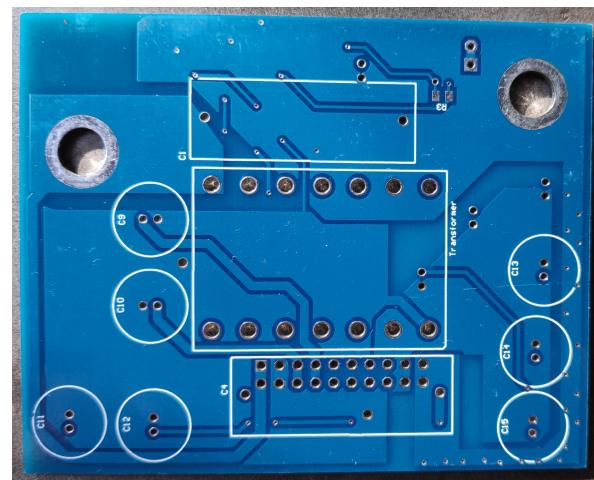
Flyback PCB Layout Drawn in Altium Designer
